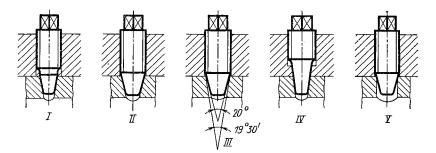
Set screws with tapered points used for locking inserted bushings the shaft is locked axially through the hub whose end faces are captured between the housing walls.
